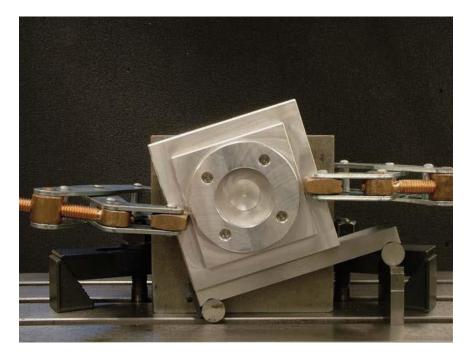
Using an angle block to position a workpiece in a vise for angular milling. © Cengage Learning 2012
